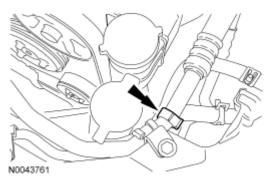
Locating Coolant Vent Hose Retaining Clip Courtesy of FORD MOTOR CO.
